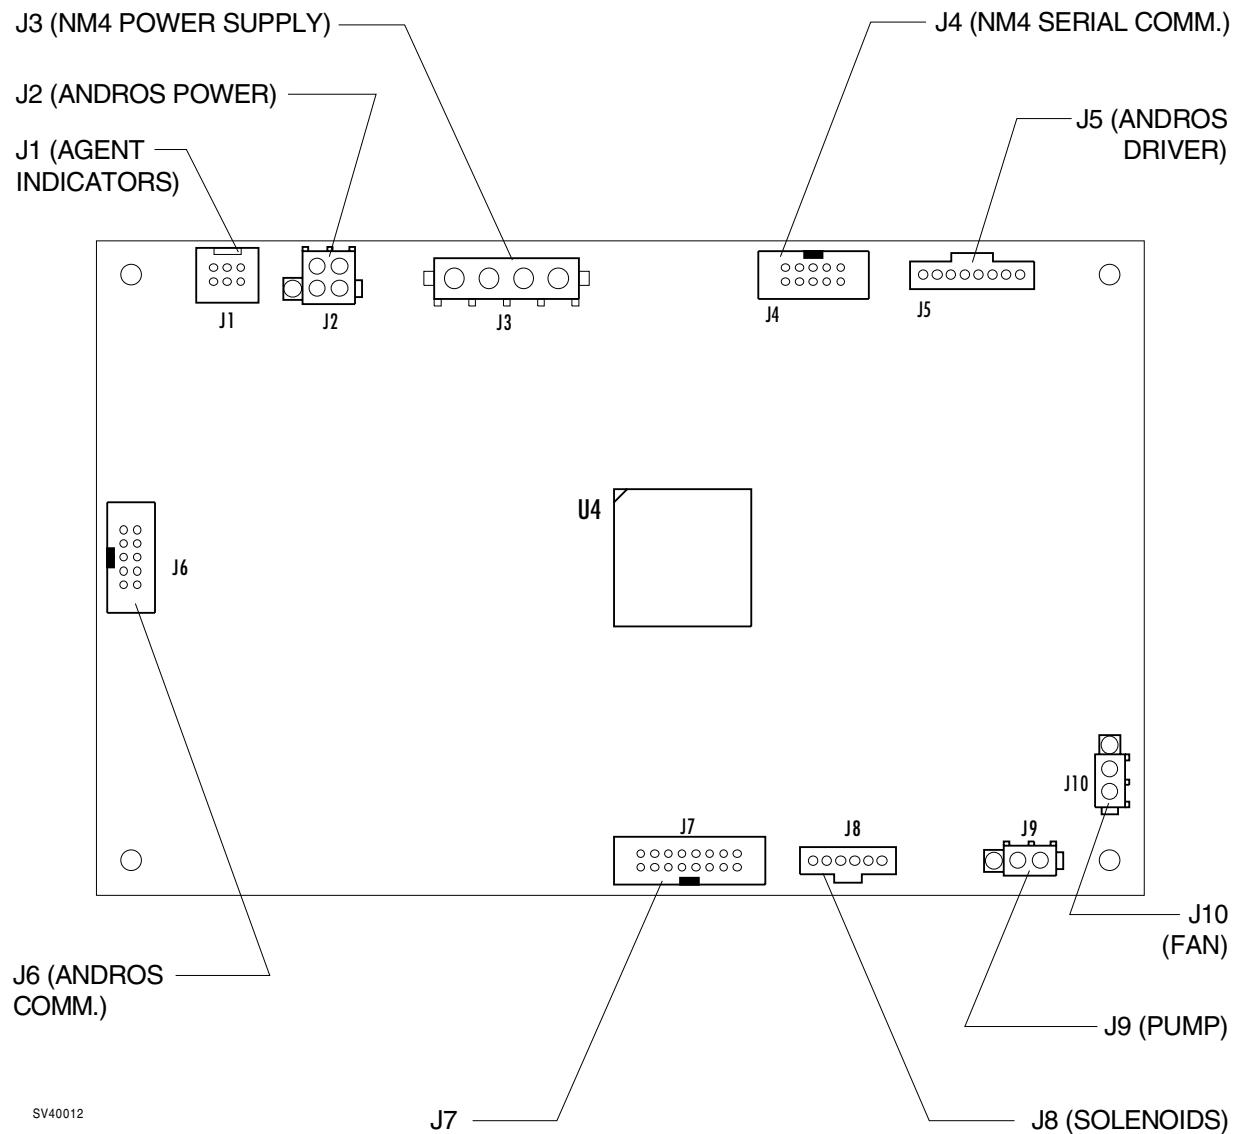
A: MULTISPEC HC11 PCB ASSEMBLY CONNECTIONS (MODEL 4610)
